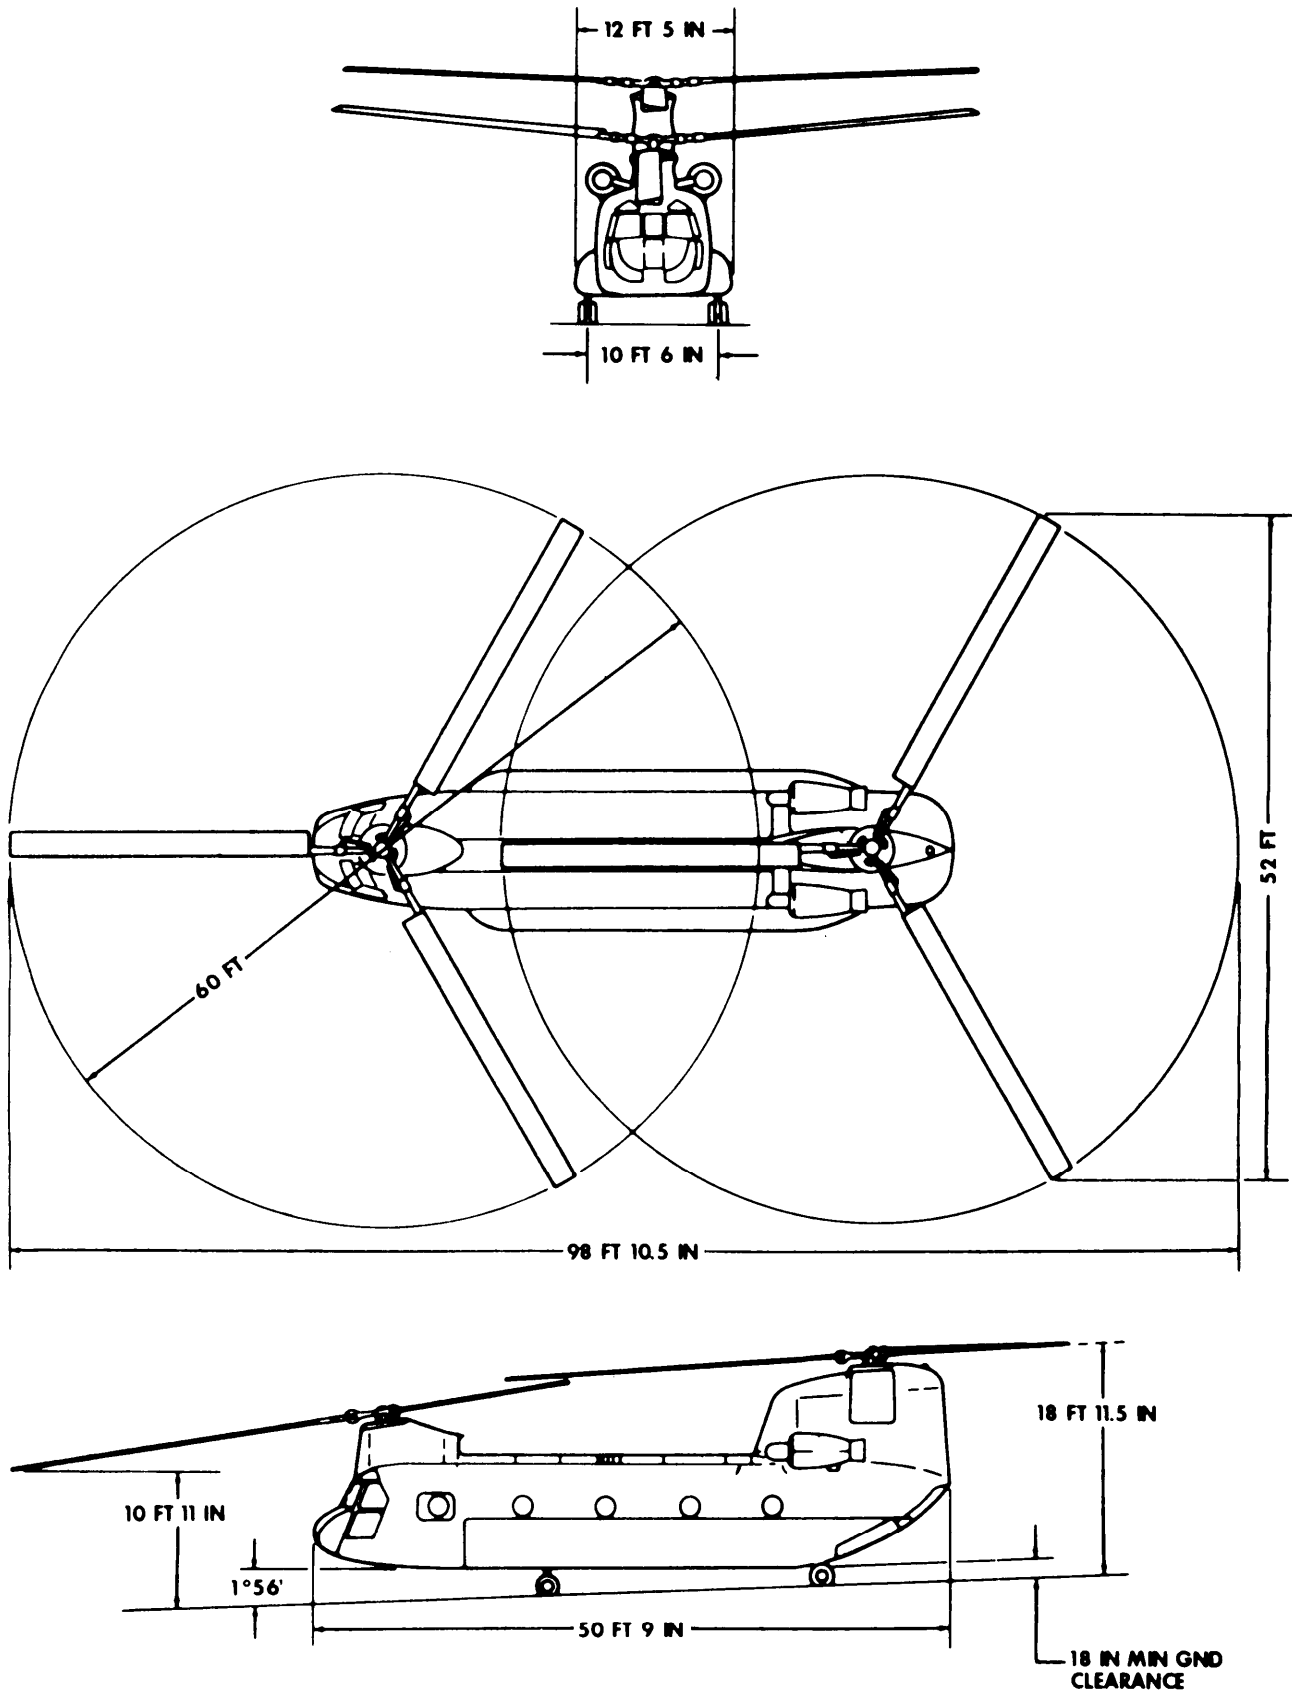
Principal dimensions, CH-47B/C (front, top, and side views).
